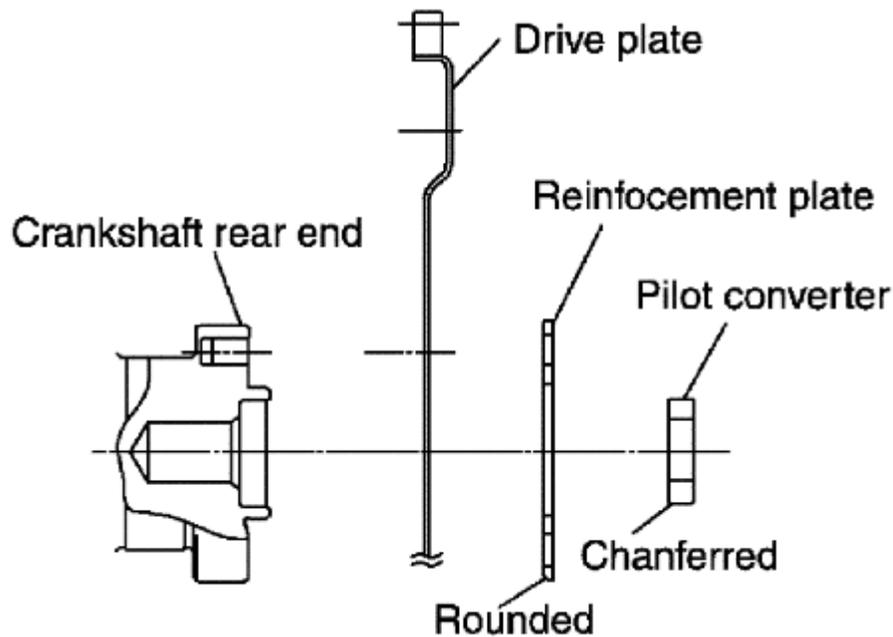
Identifying Crankshaft Rear End And Drive Plate
